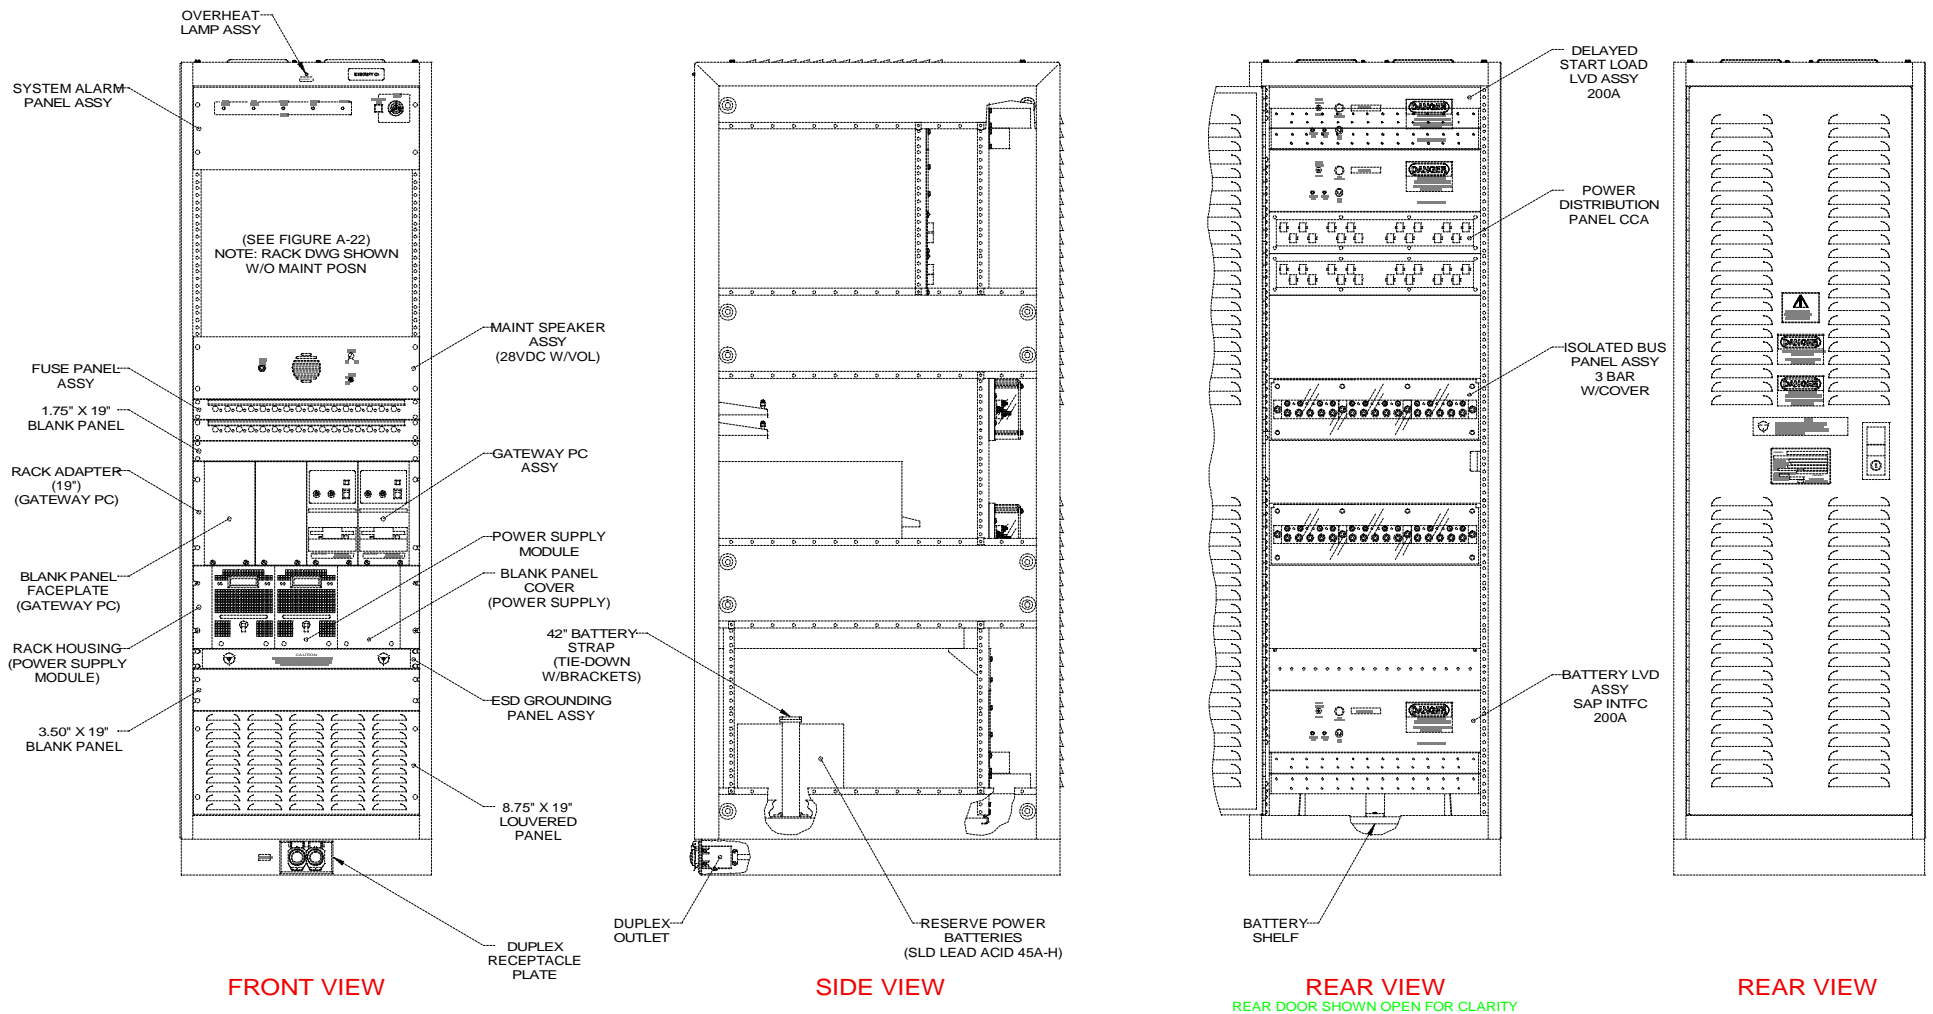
Basic ETVS System 2 (BS-2); Racks 1-3; Front, Side, and Rear Views (Sheet 1 of 3)
